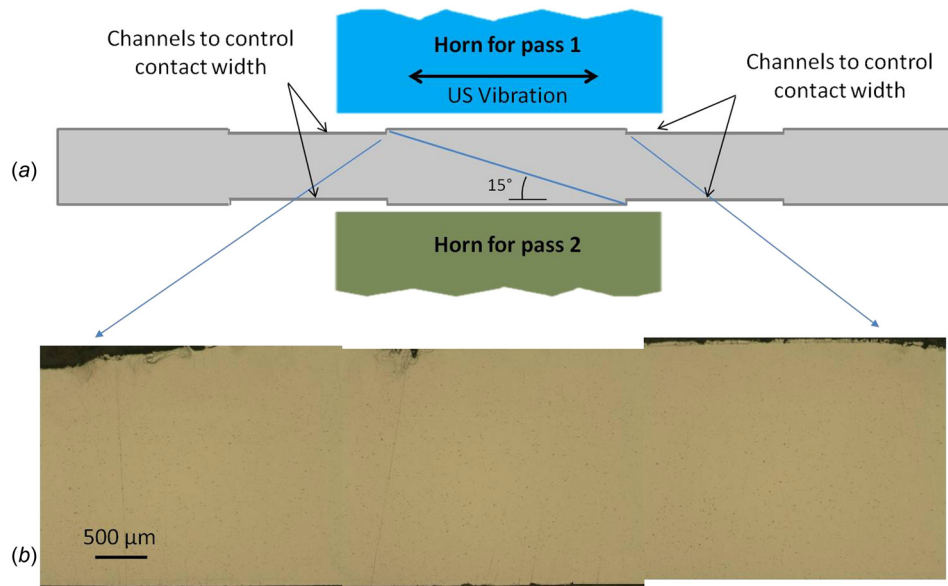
Scarf joint with welding on both sides: (a) schematic and (b) cross section
